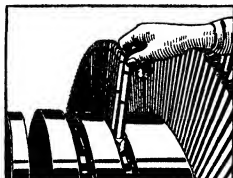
RADIAL CLEARANCE—REACTION BLADING
